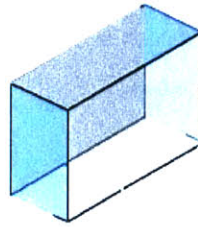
The illustration of the design process and chassis design for housing prototype.
